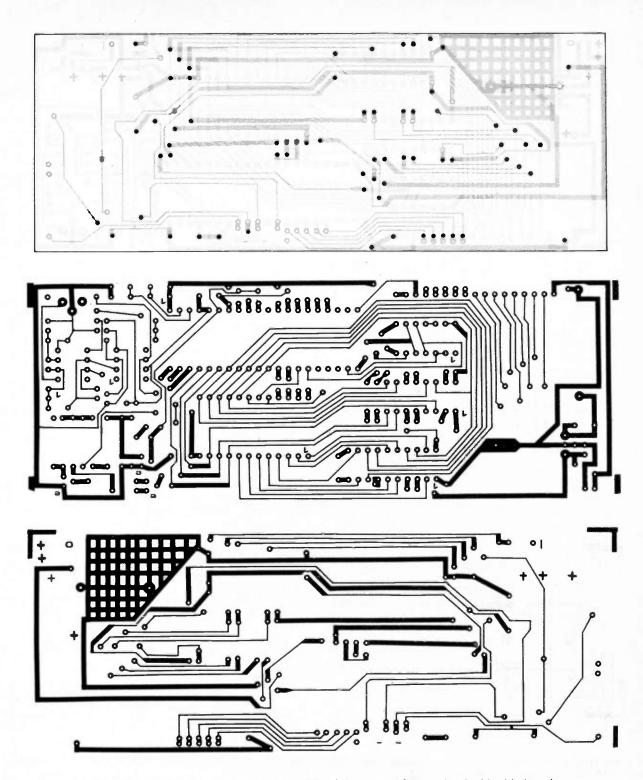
Through hole connections and details of the layout of the main, double sided p.c.b.
